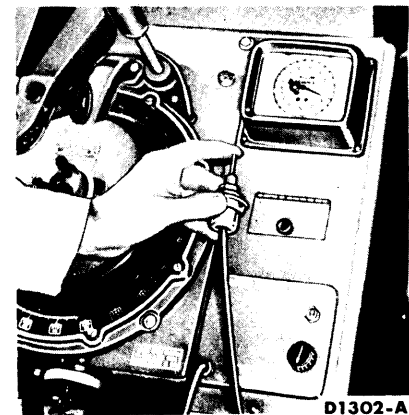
Testing Transmission Vacuum Unit For Leakage
